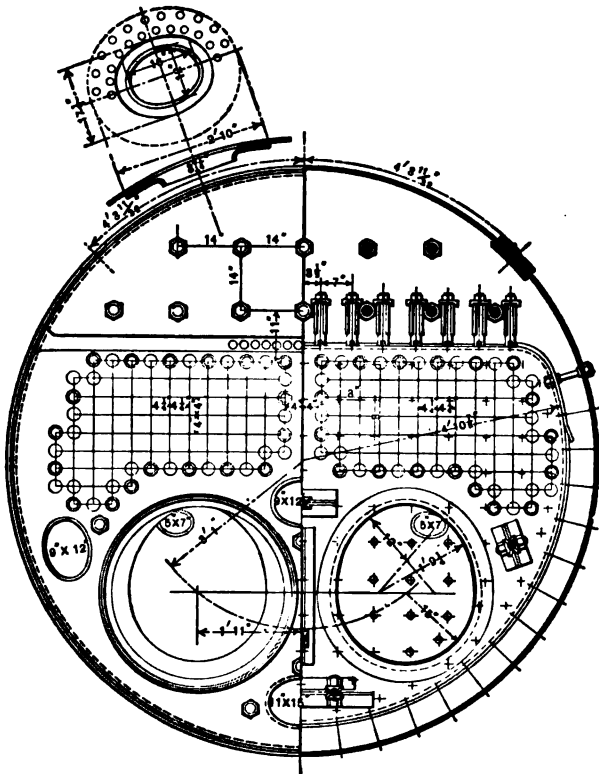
Scotch Boiler. End view and section of Fig. 21.
